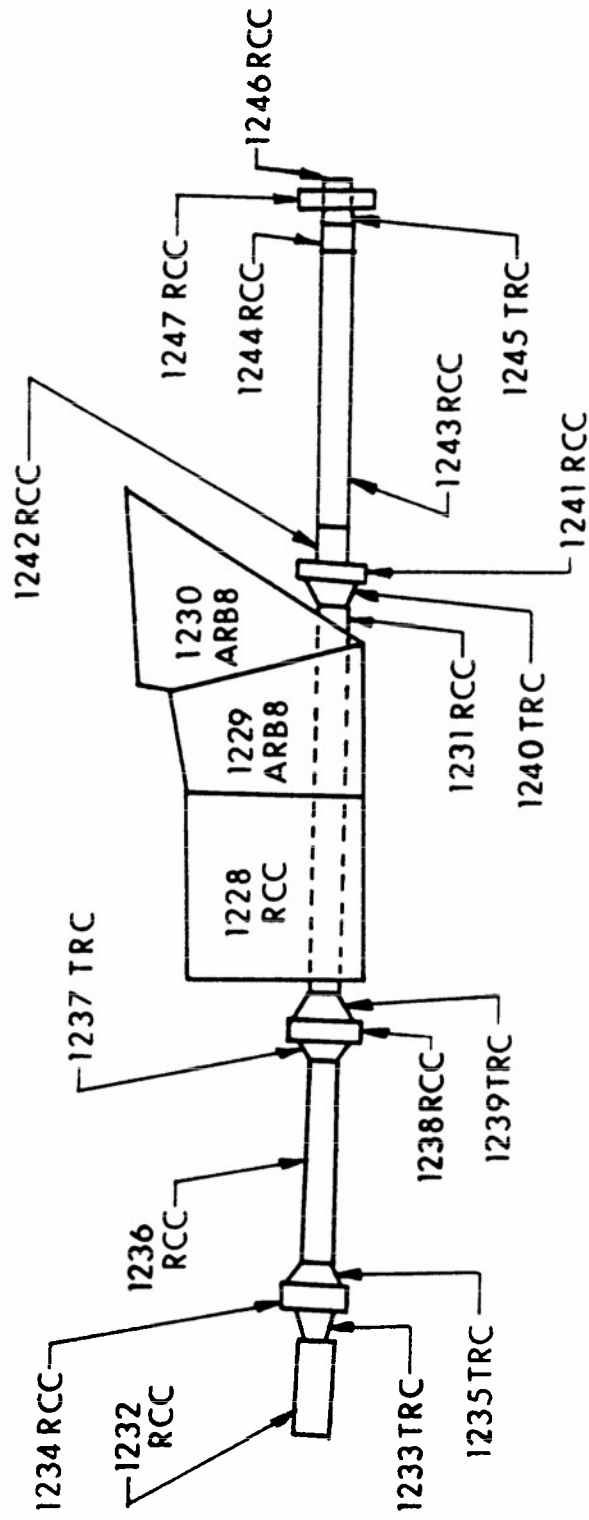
Solids Used to Describe the Front Tail Rotor Drive Shaft Components of the Black Hawk.
